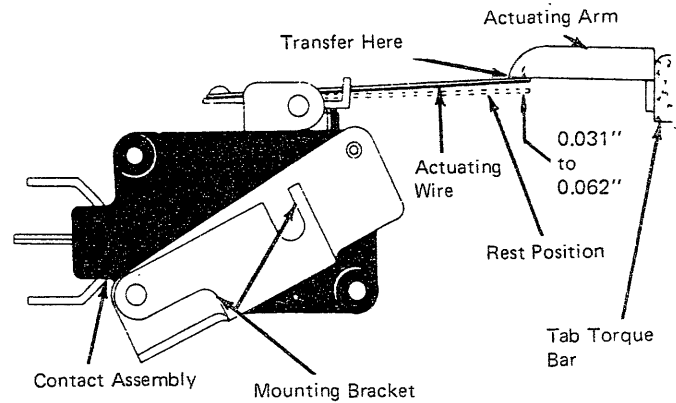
Tab-Interlock Contact Transfer (Level 1)
